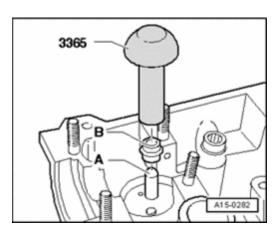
Identifying Plastic Sleeve, Valve Stem Oil Seal & Valve Stem Seal Driver 3365 Courtesy of VOLKSWAGEN UNITED STATES, INC.
